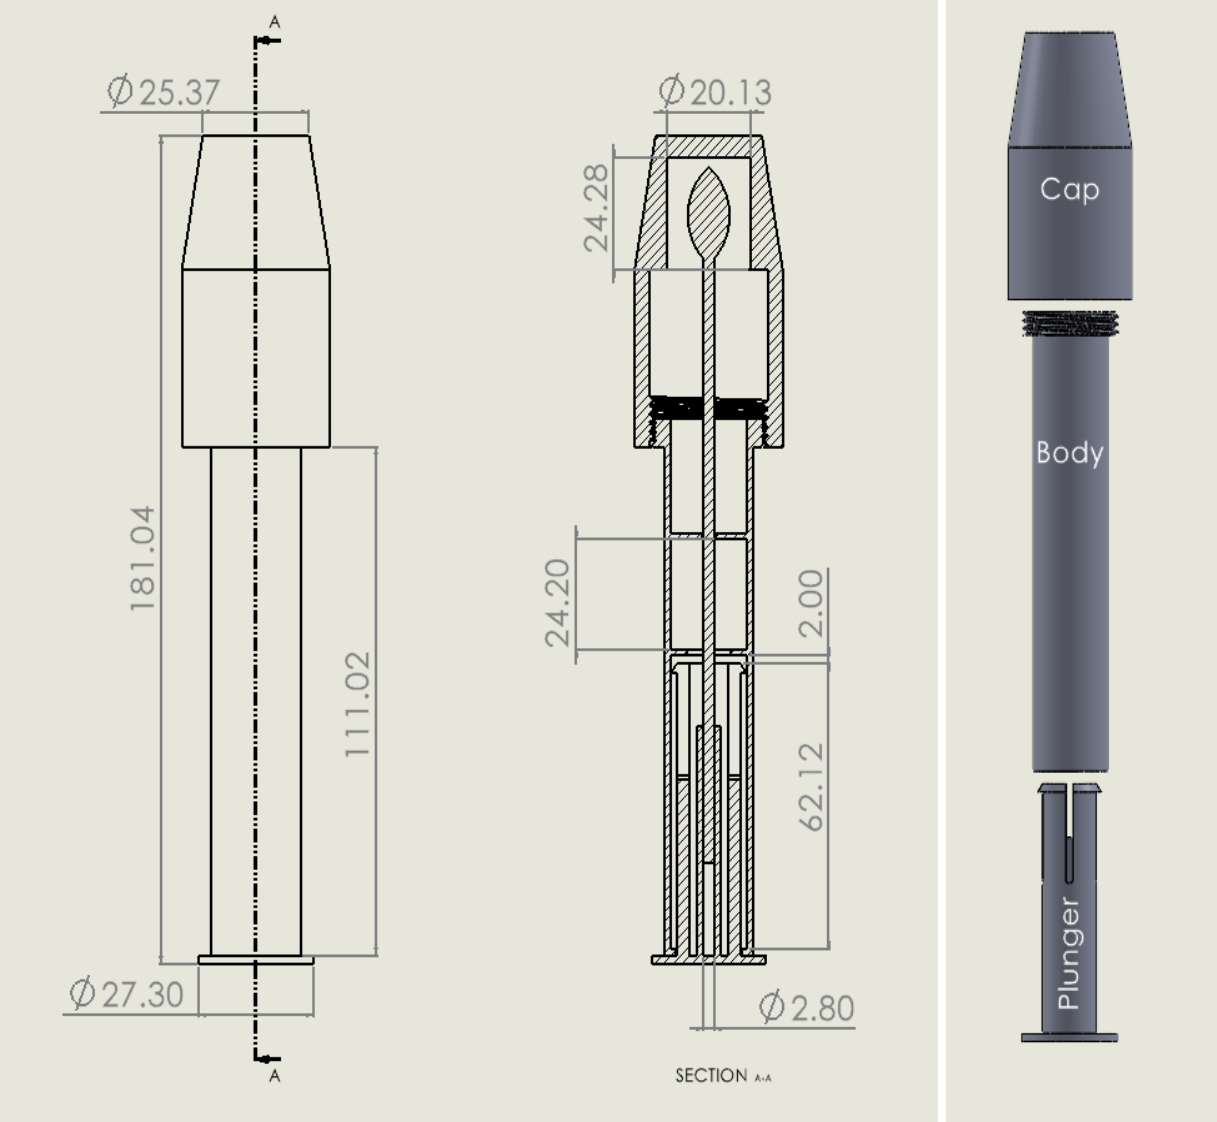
SolidWorks Drawing of Final Prototype, dimensions labeled in millimeters.
